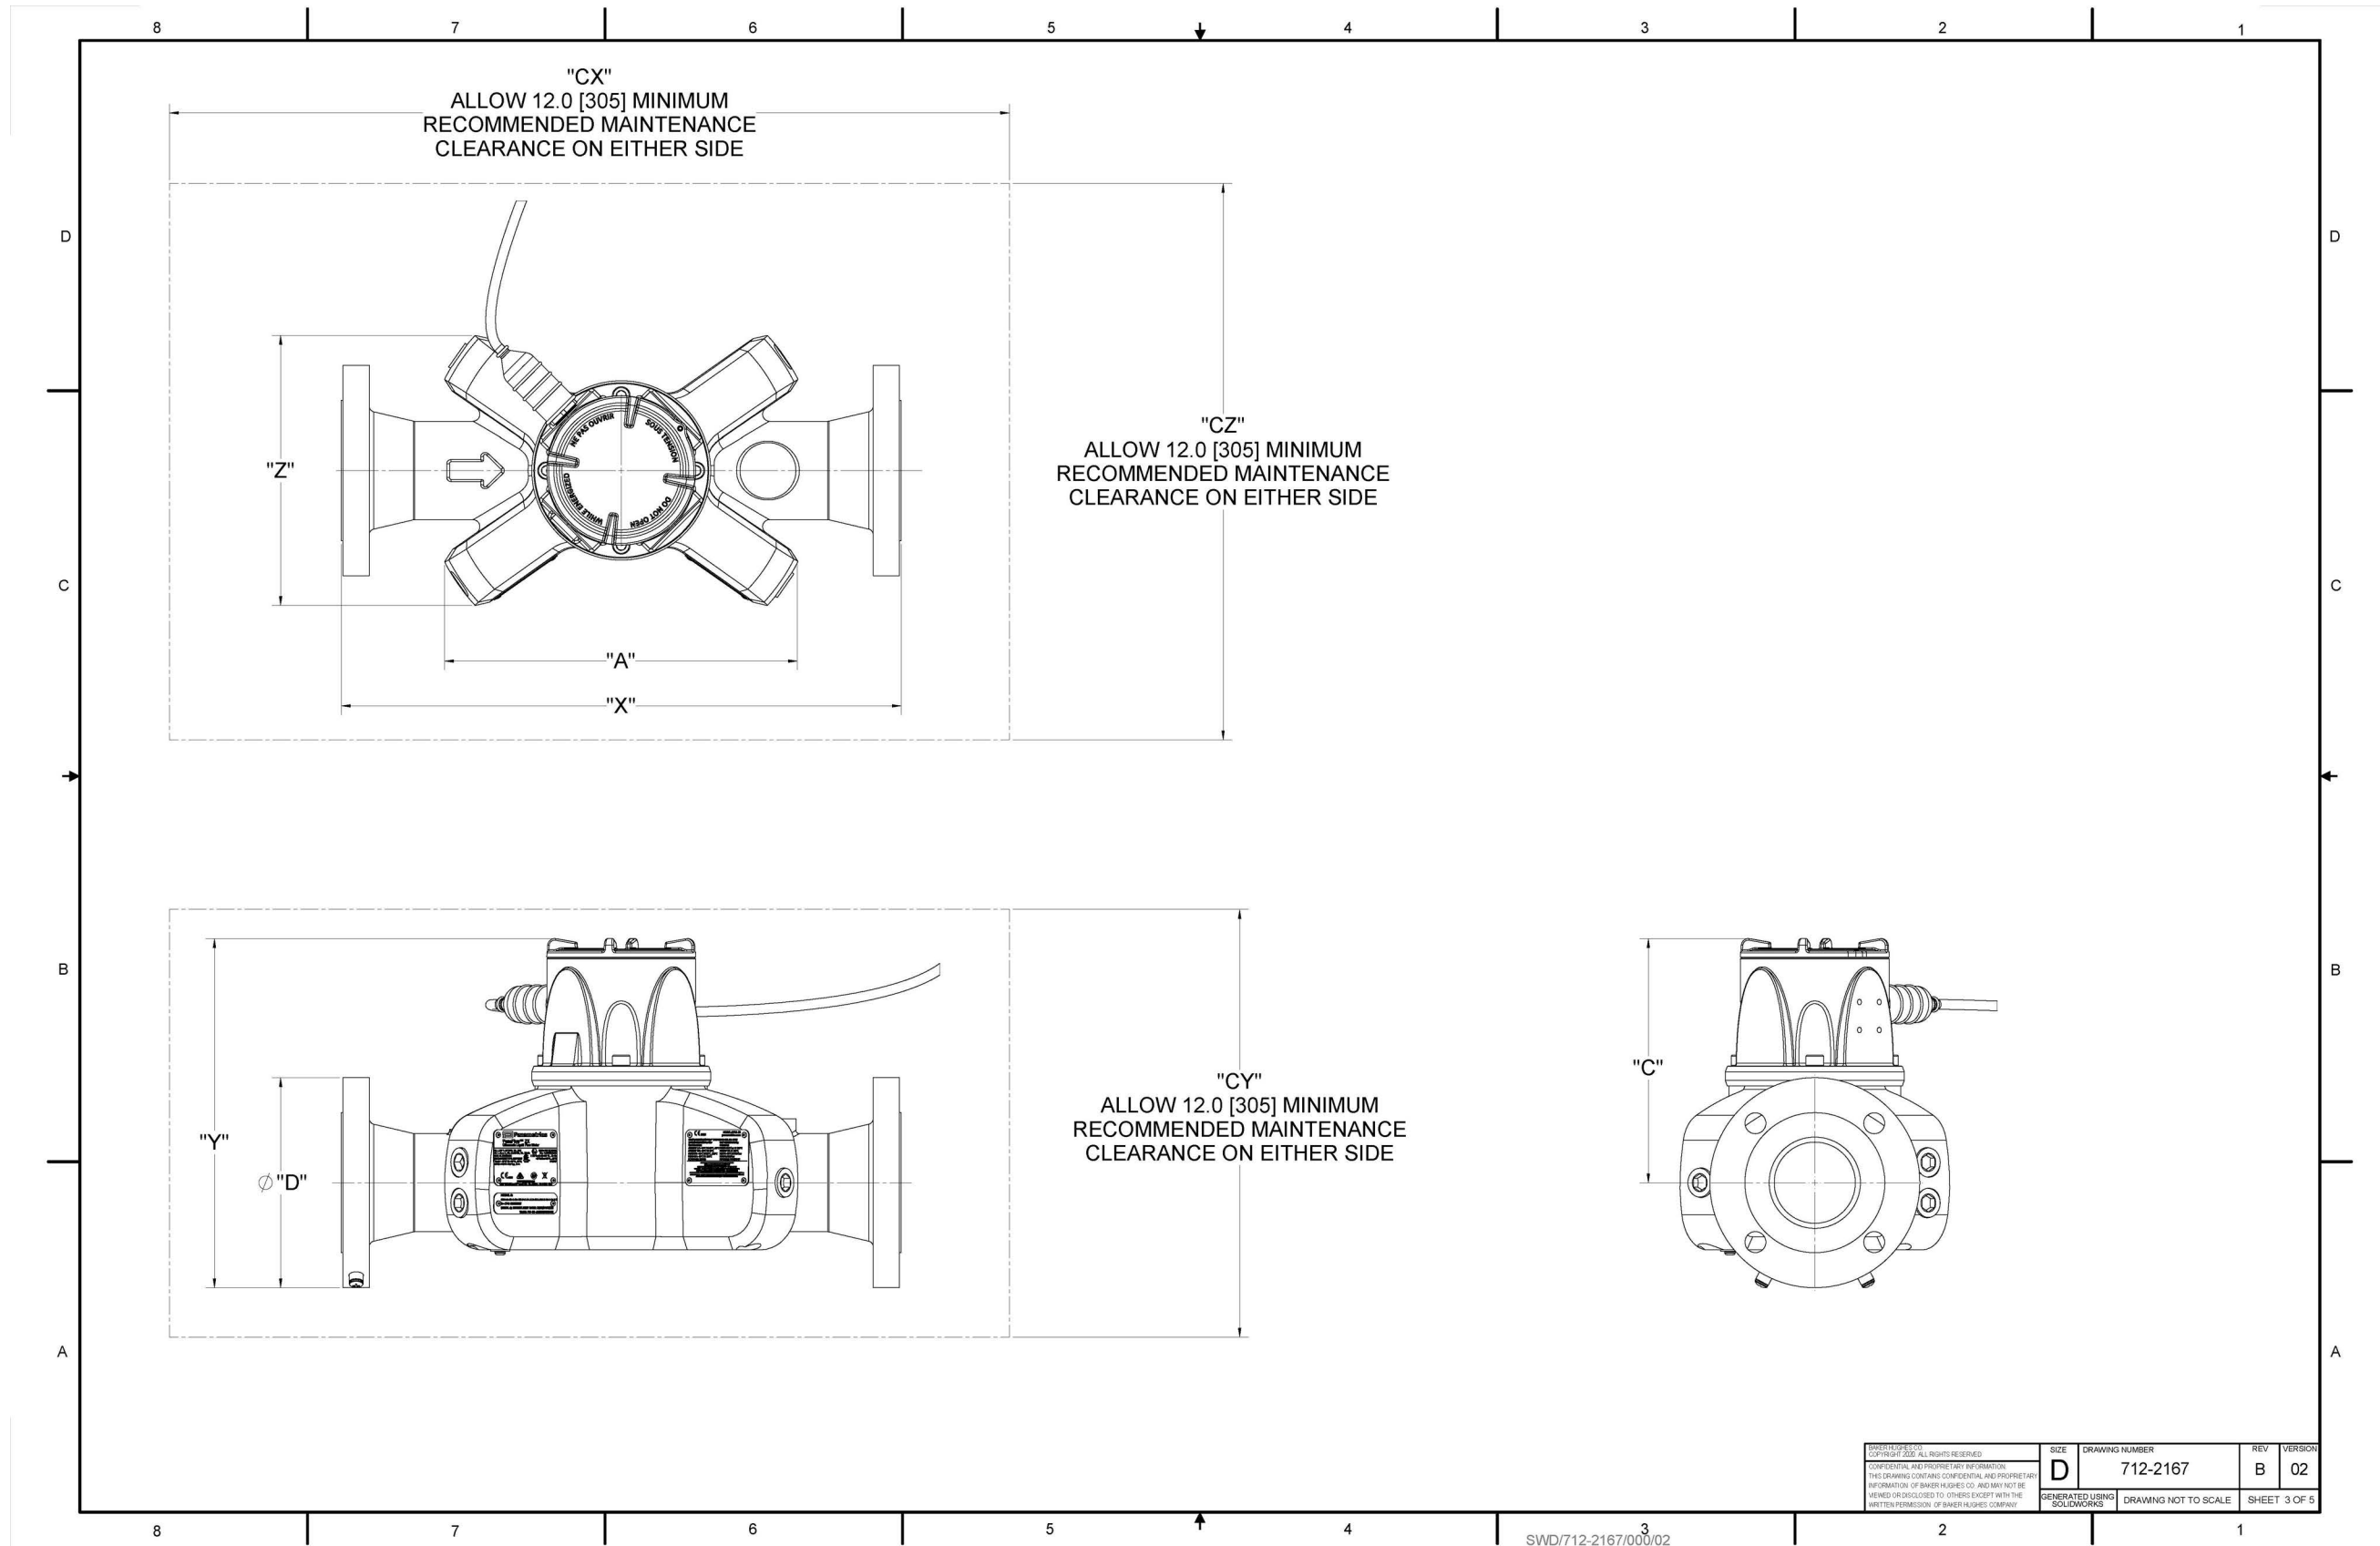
Outline and Installation drawing - remote mount (712-2167, sheet 3)
